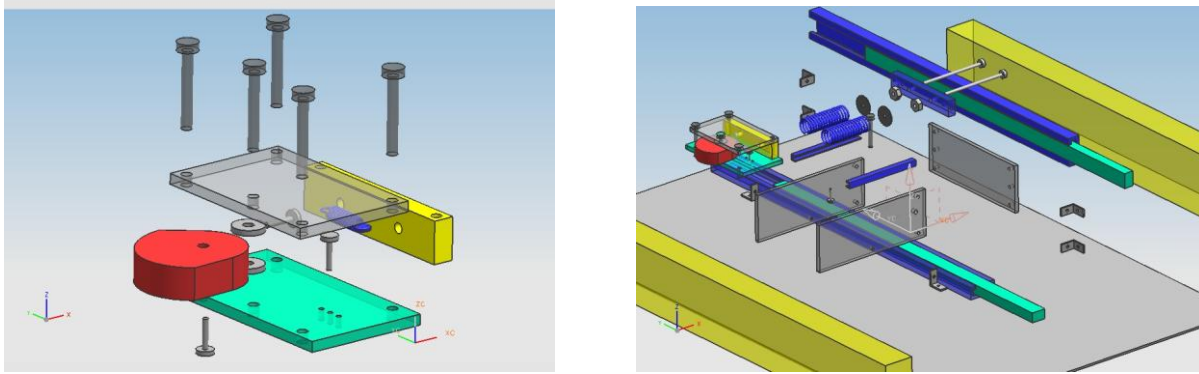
Exploded views of cam frame sub-assembly (left) and overall assembly
